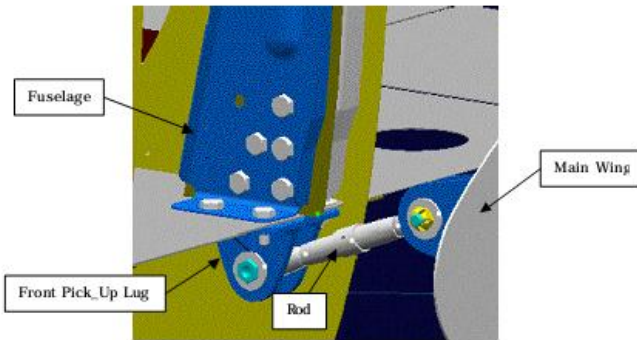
Front Pick-Up Lug shape connected Main Wing and Fuselage by a rod [2]
